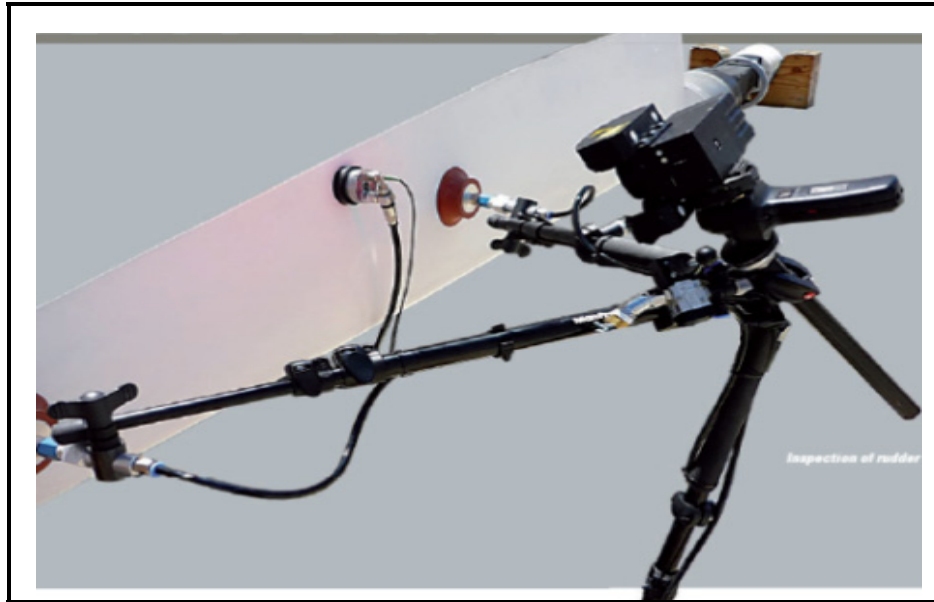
The blade inspection using shearography technique (courtesy of Edevis Company)
